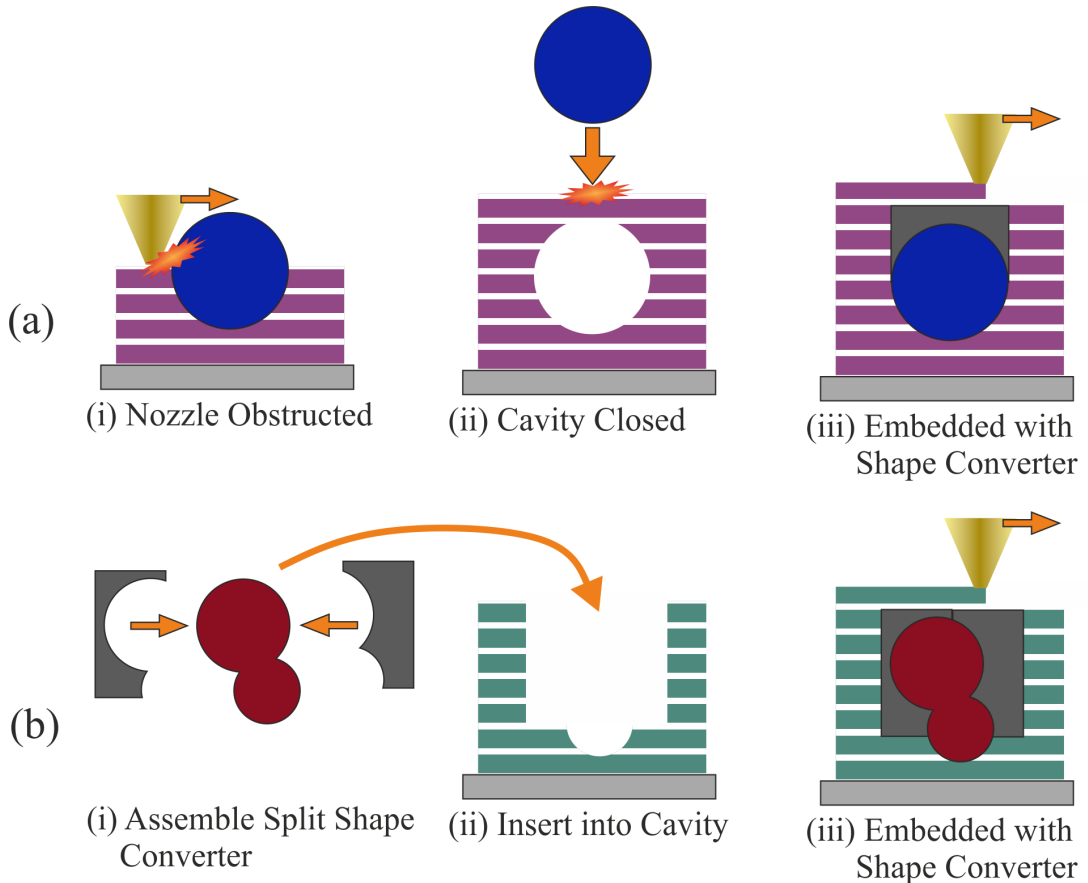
Cutaway side views of embedding during FFF. (a) A component with a convex top surface cannot be embedded without modification to the cavity, (i) as it will protrude from the top of the printed part if inserted when the cavity is wide enough. (ii) If the layers are built up enough to stop the collision, the cavity will have narrowed and closed, preventing insertion. (iii) To embed this shape, the cavity is created with vertical sides and a Shape Converter (grey) is used to fill in the void that is left. (b, i) More complex shapes with undercuts require multi-part Shape Converters so that they can be assembled around the component. (ii) These convert the outer shape to vertical sides so that it can be inserted downwards into the cavity and (iii) has a horizontal top so that printing can continue.
